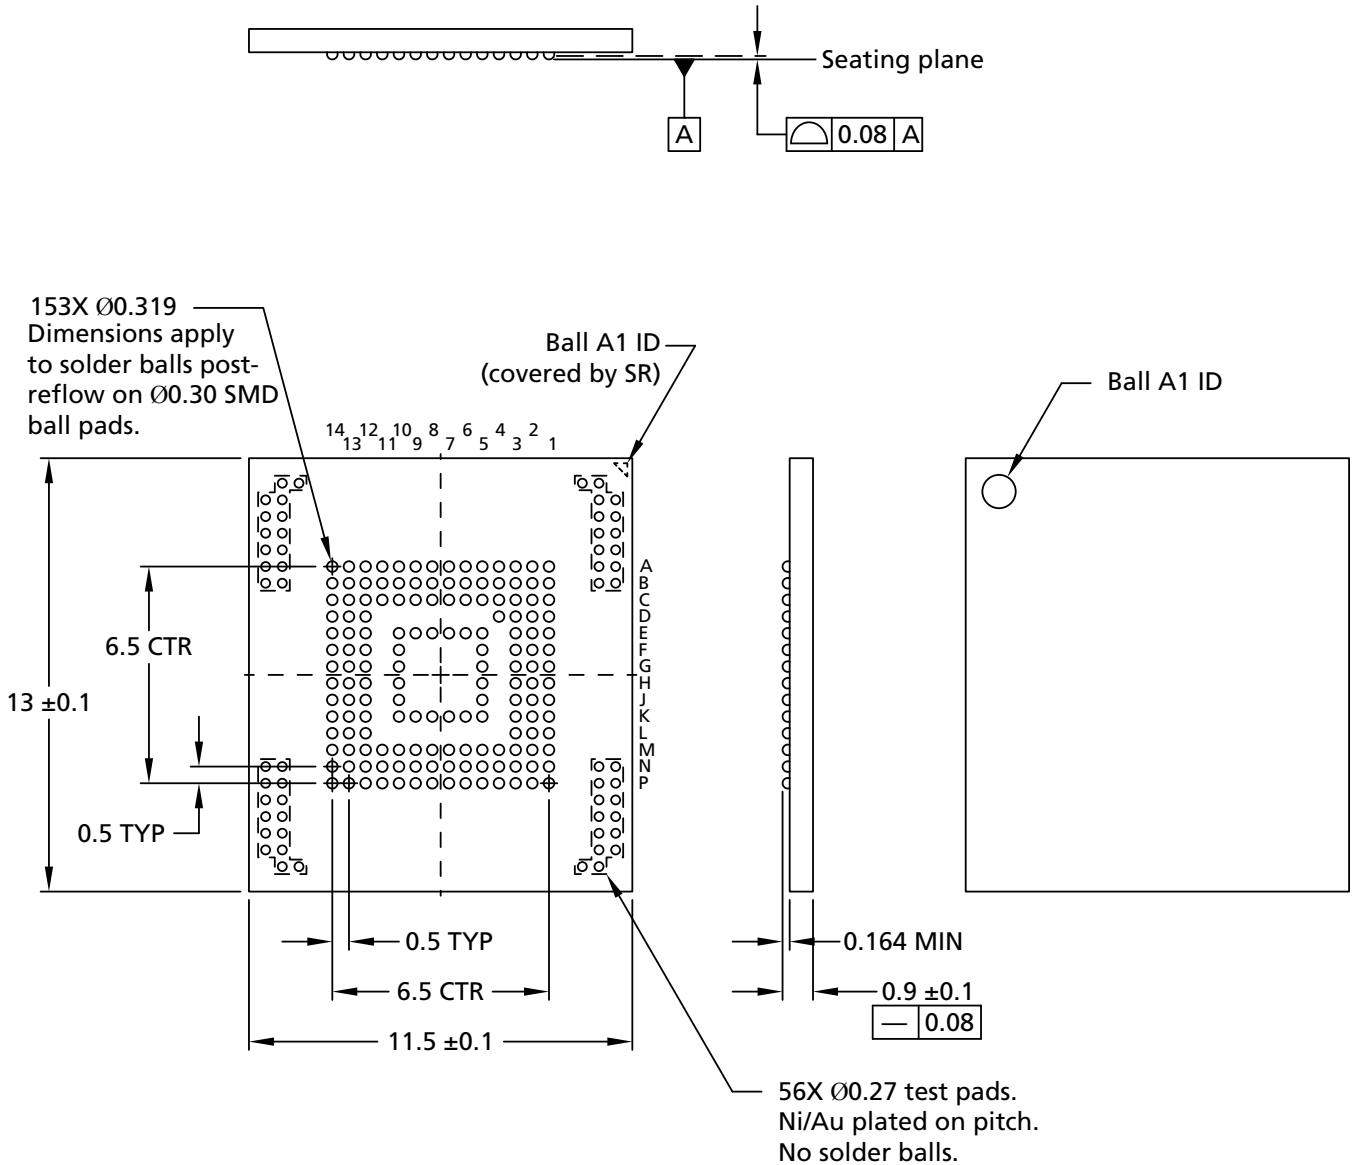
153-Ball TFBGA – 11.5mm x 13.0mm x 1.2mm (Package Code: NS)
